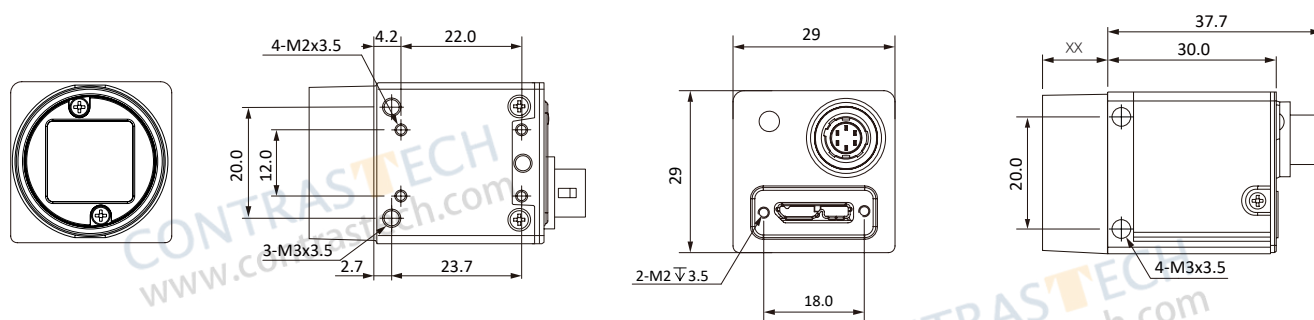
Mechanical Dimensions (in mm) for USB3.0 Cameras with four-sided mounting 29 \* 29 \* 30mm housing.
